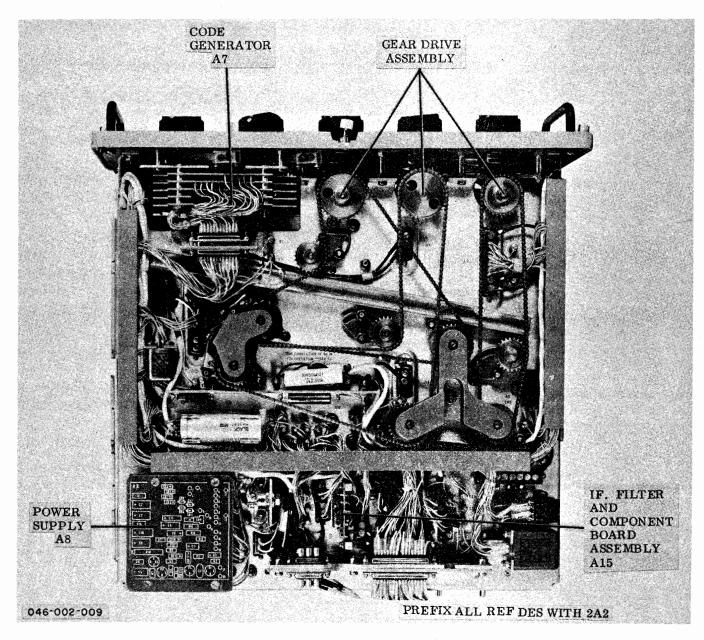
Radio Transmitter T-827B/URT, Bottom View, Case Removed
